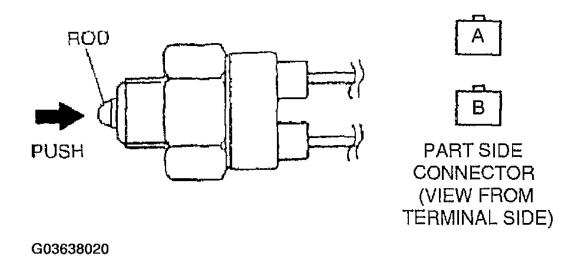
Identifying Neutral Switch Part Side Connector Courtesy of MAZDA MOTORS CORP.
